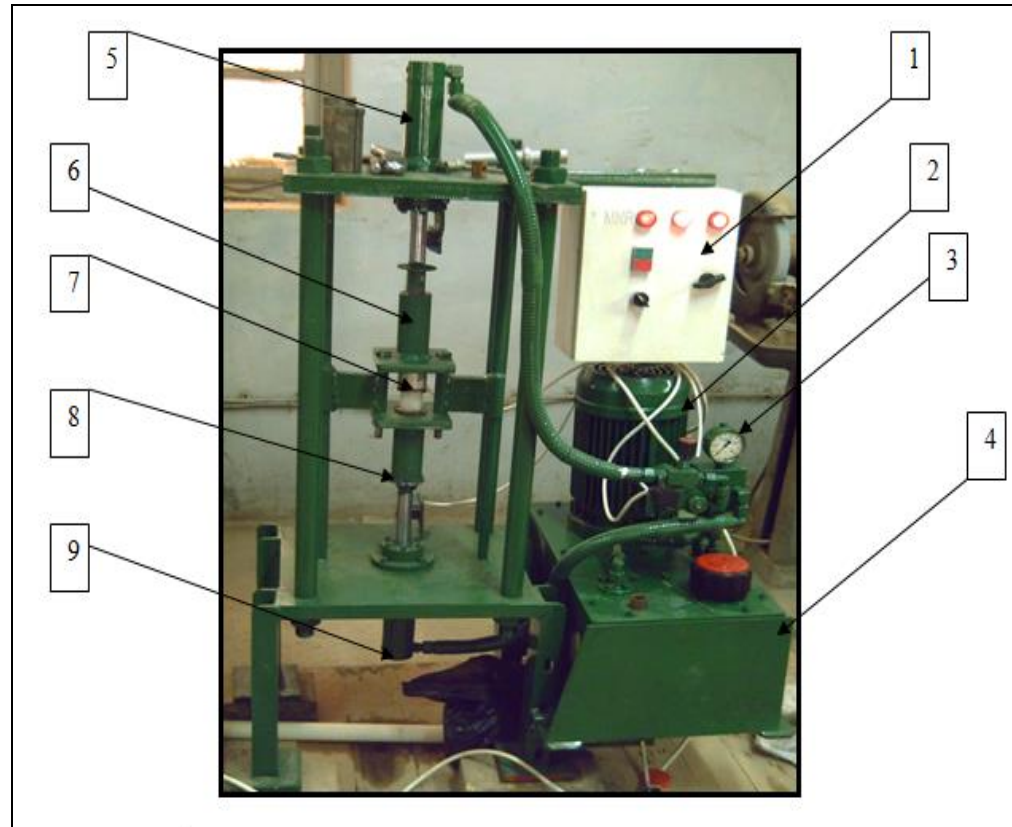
AFM setup:(1) control box,(2) electrical pump, (3) pressure gage, (4) hydraulic unit, (5) upper hydraulic cylinder, (6) upper medium cylinder, (7) workpiece And fixture, (8) lower medium cylinder, lower ydraulic cylinder
